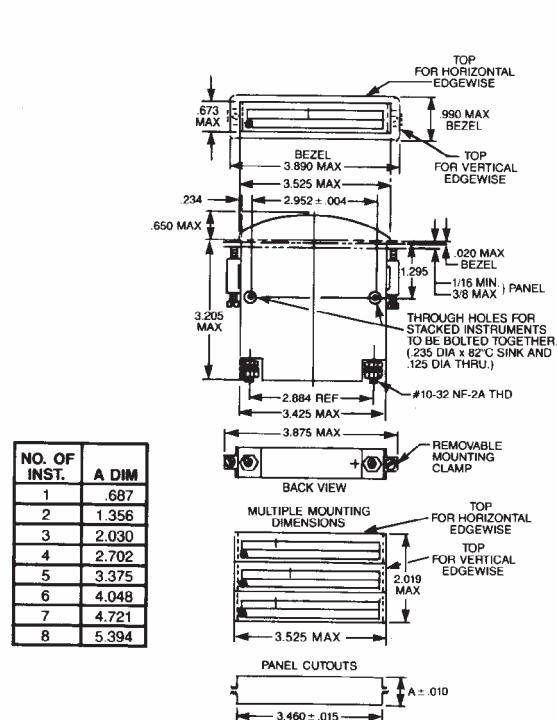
Outline Dimensions for 3½ -inch Type 288 Meter
